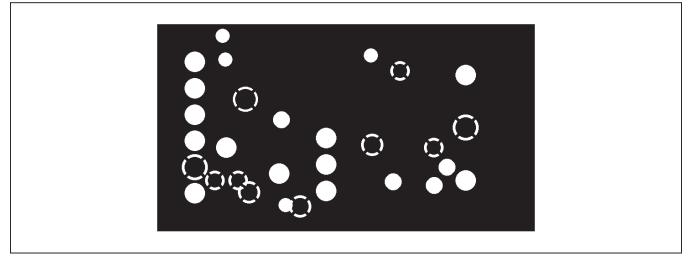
MAX11205PMB1 Peripheral Module PCB Layout—Inner Layer 1 (Ground)
